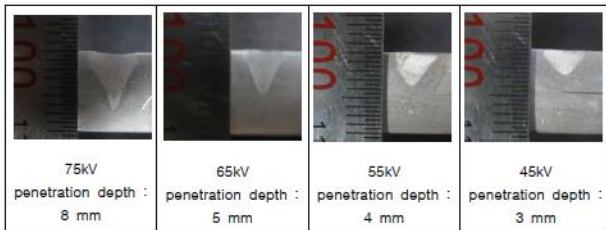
Macro-cross sections of EB welded specimens.
